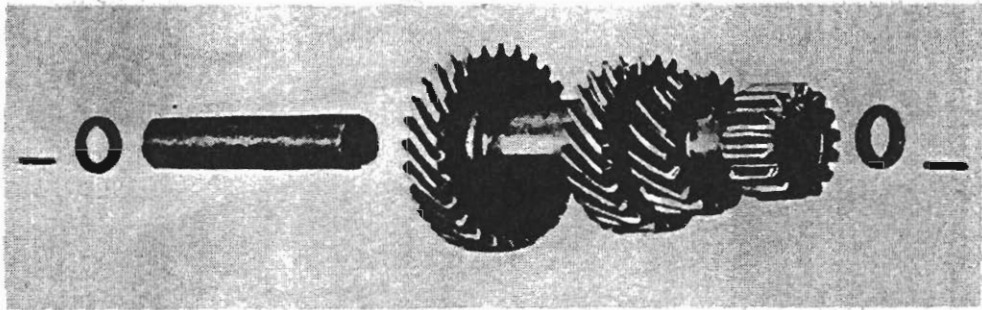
Bearing Rollers Installed Between Cluster and Countershaft.
